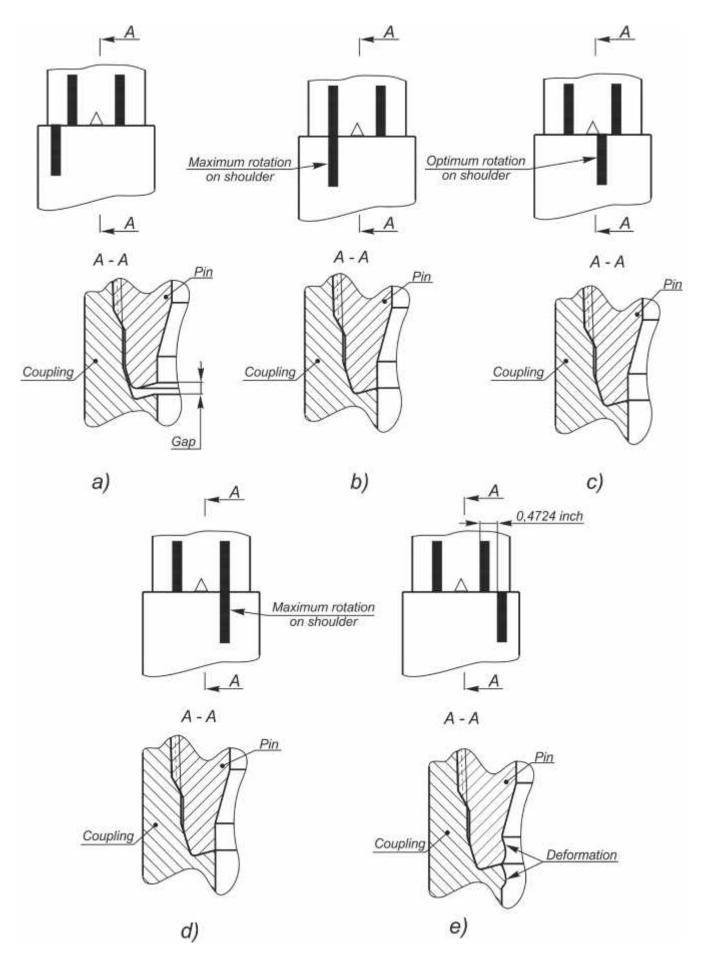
Locations of make-up marks and mating surfaces of thread shoulders
